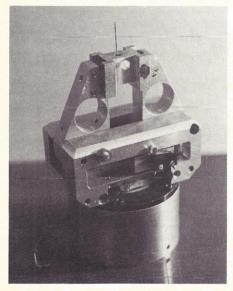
The fixed-gap gripper of Photo 2 shown holding a needle in a fixture.
